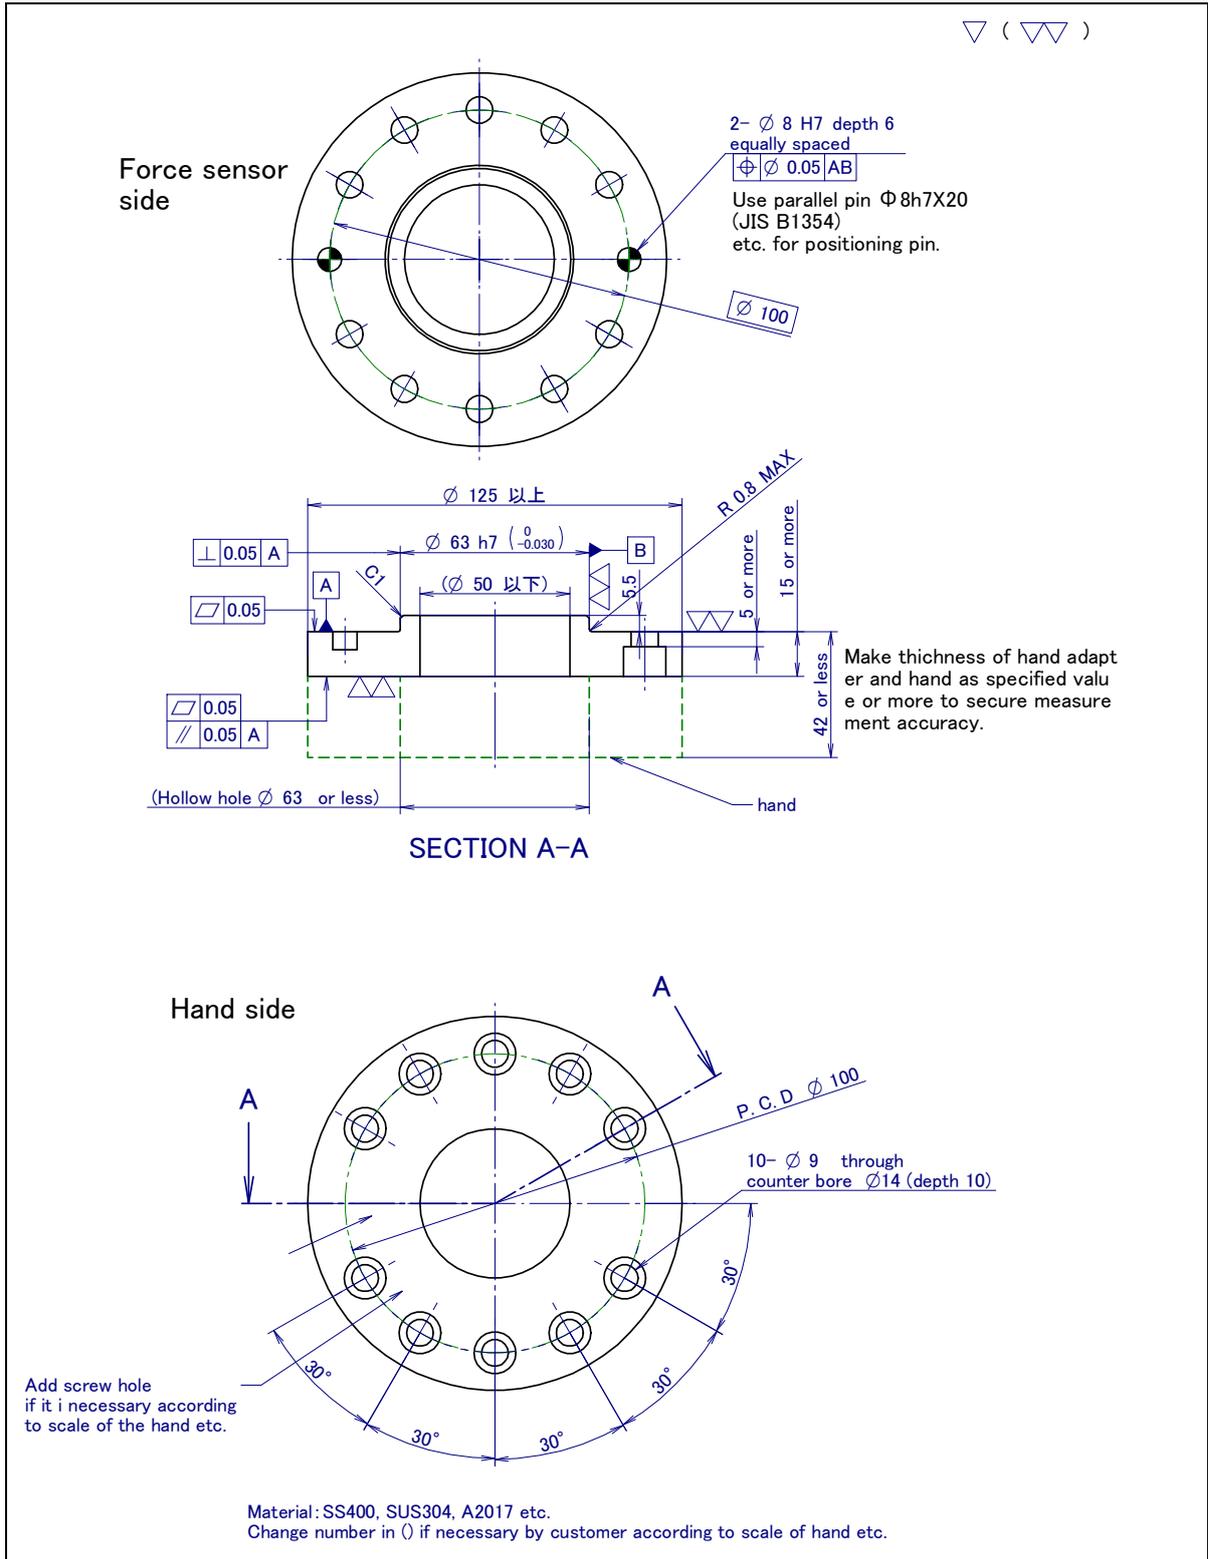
(c) Example of designing the hand mounting adapter (FS-100iA)
